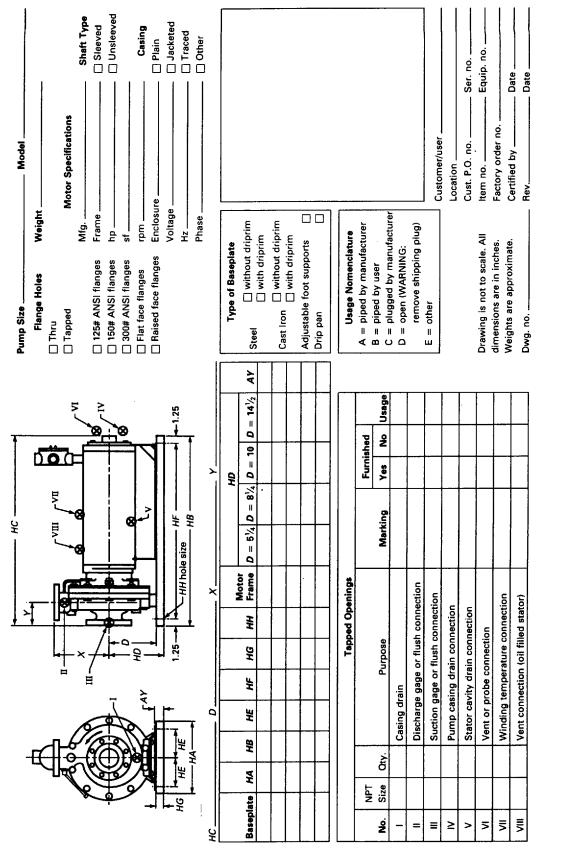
PUMP AND DRIVER OUTLINE DRAWING FOR CANNED MOTOR PUMPS
